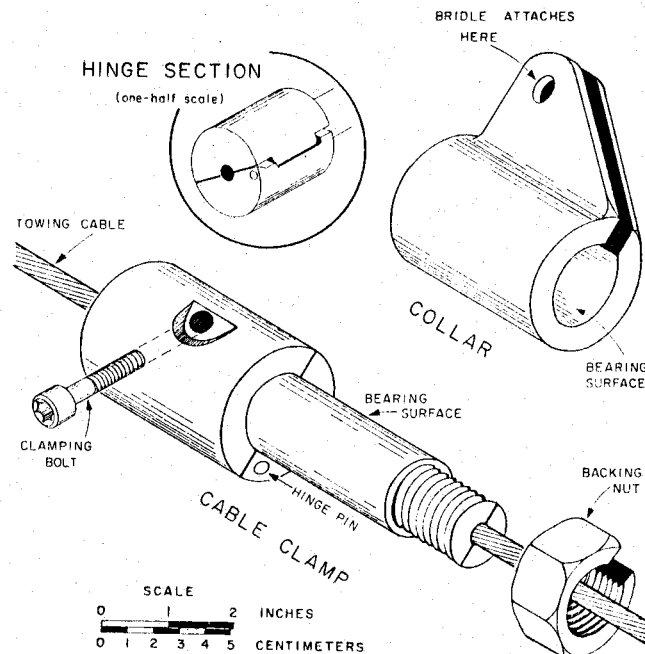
Exploded view and scale drawing of the "BG" Clamp.
